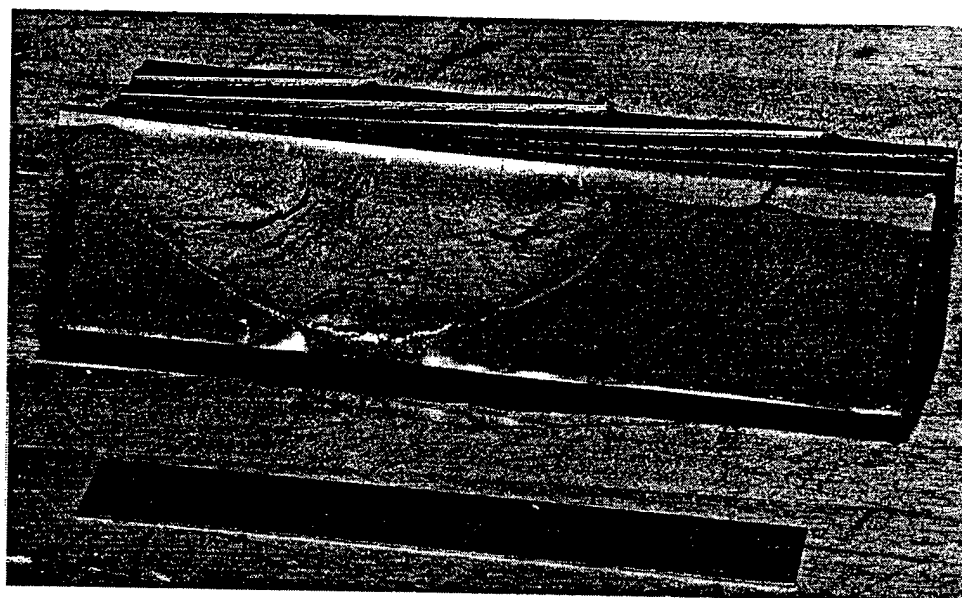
XM776 S/N 001 keyway fracture surface.
